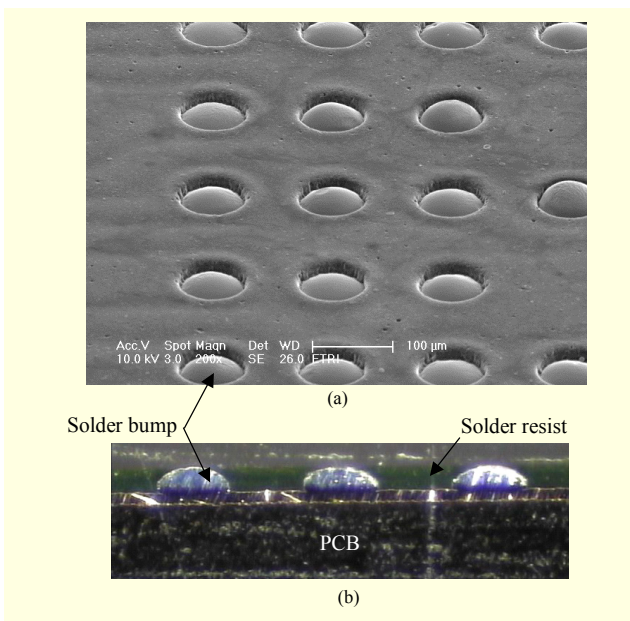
(a) SEM image and (b) cross-section of formed SAC305 solder bump arrays.
